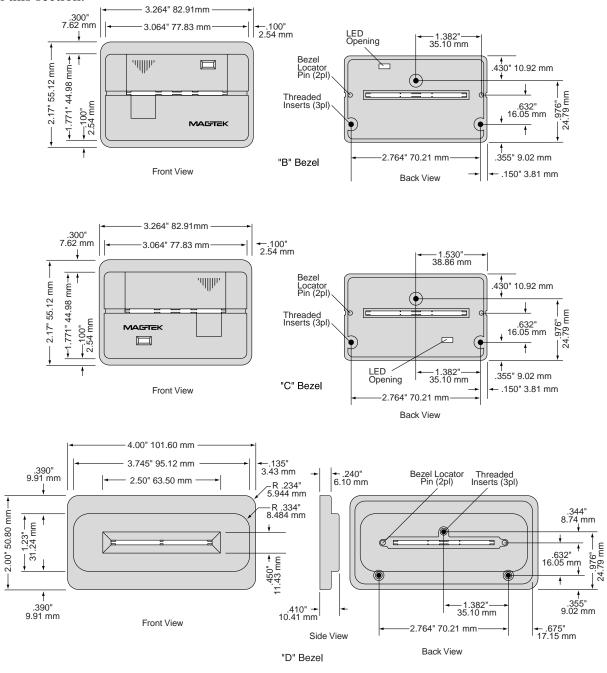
Bezel Mounting Dimensions – B, C, and D Bezels
